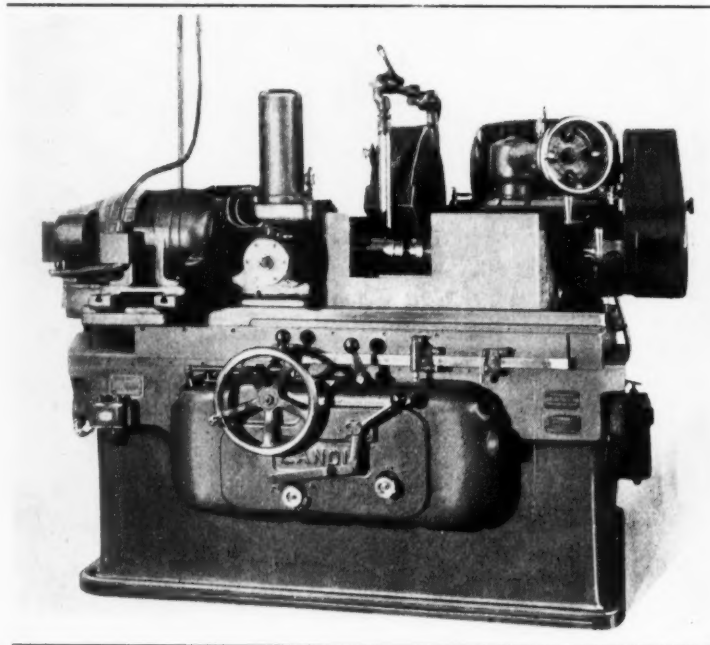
Landis Machine for Grinding Pistons Under Size across the Pin Holes
